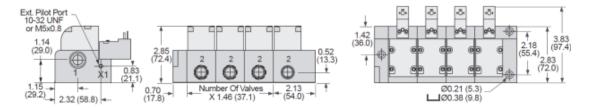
10500-3520-MPXR 3520 C multiplexer valve accessory - dimensions in inches [mm]
